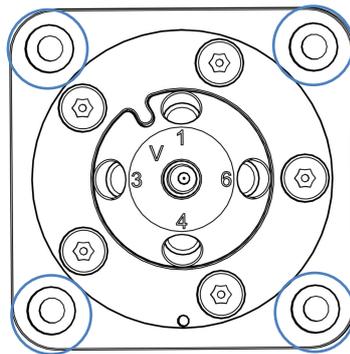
4 Screws fixing the injection valve at the VC-autosampler
